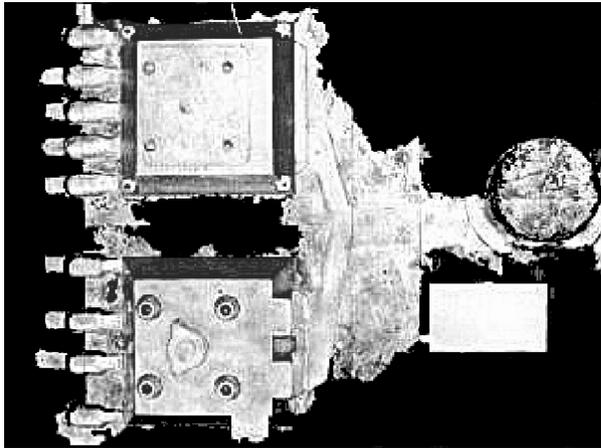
Casting with flash produced on a 700-ton aluminum die cast machine
